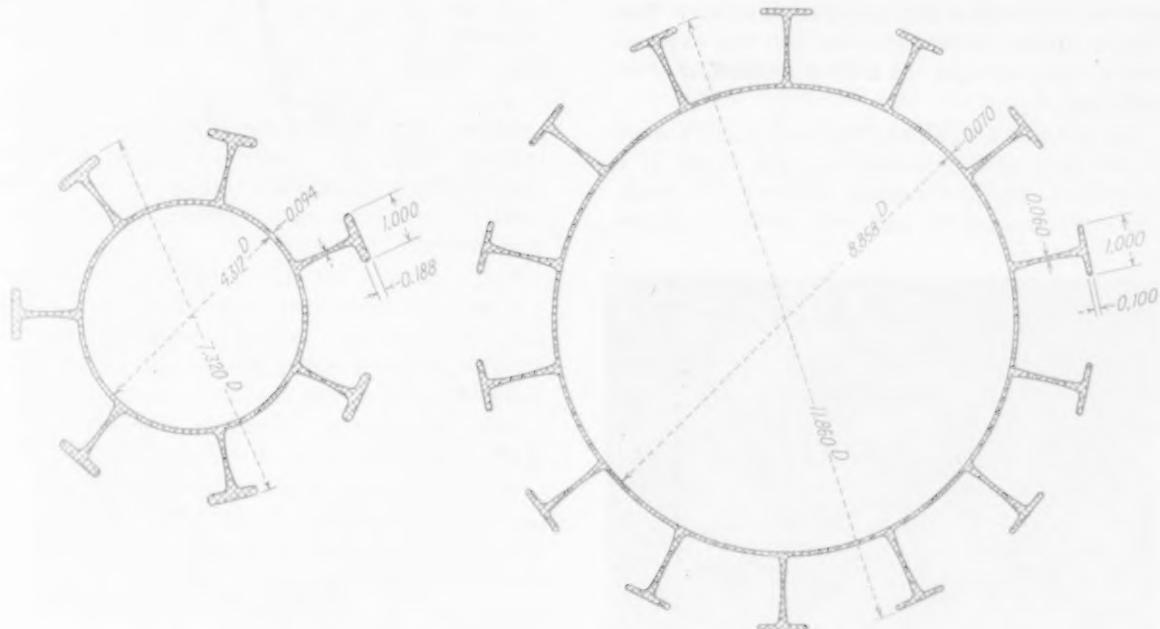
Original section extruded by Reynolds had the dimensions shown at left. At right is a section of the extrusion from which a 28-in. wide sheet is made, the widest currently available.
